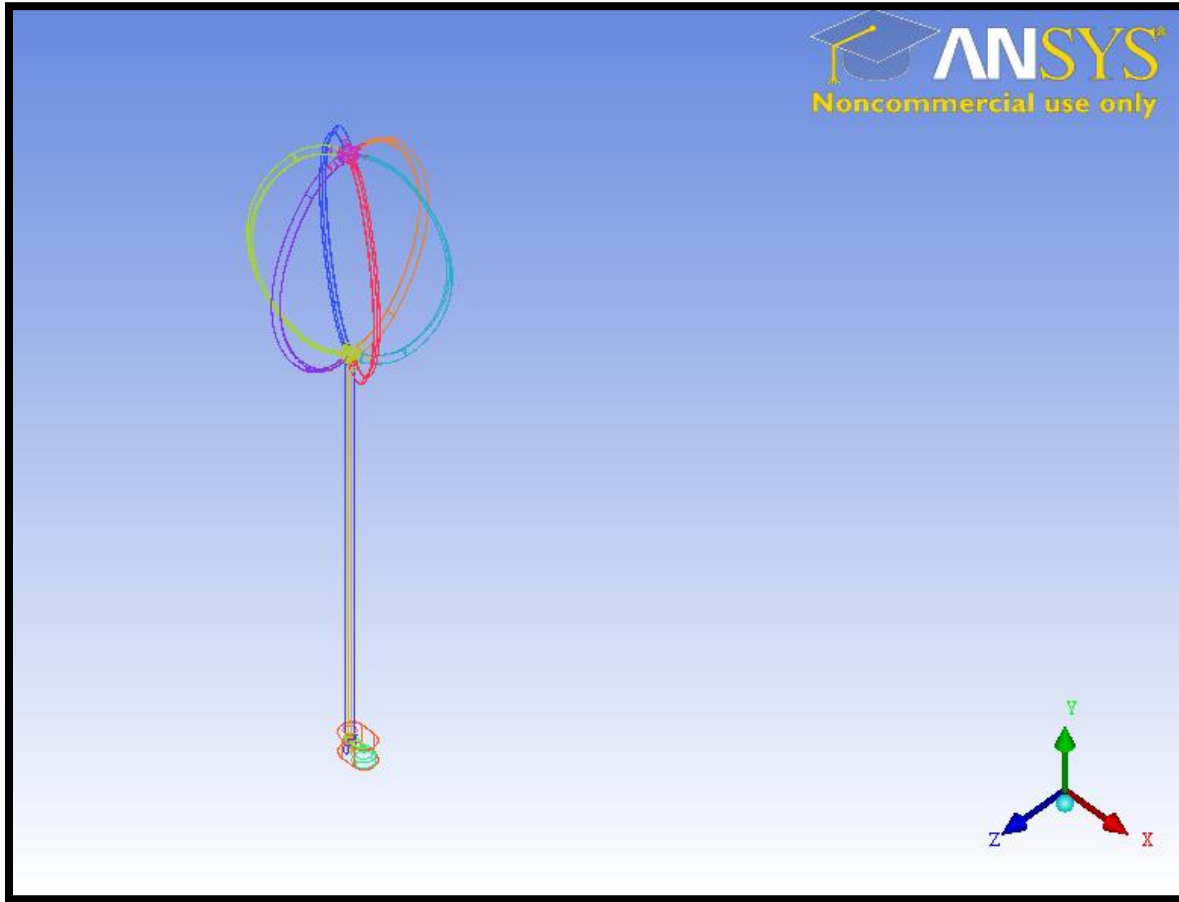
CAD drawing of the VAWT design. The mounting pole is six meters high, the profile of each blade is 87.32 mm (3.44 in), the radius of the turbine is 937.09 mm (36.89 in), and the length of each blade is 3200 mm (10.5 ft). *Note: This drawing was created by Jesper Thomsen (33) and is used in this thesis with his permission.
